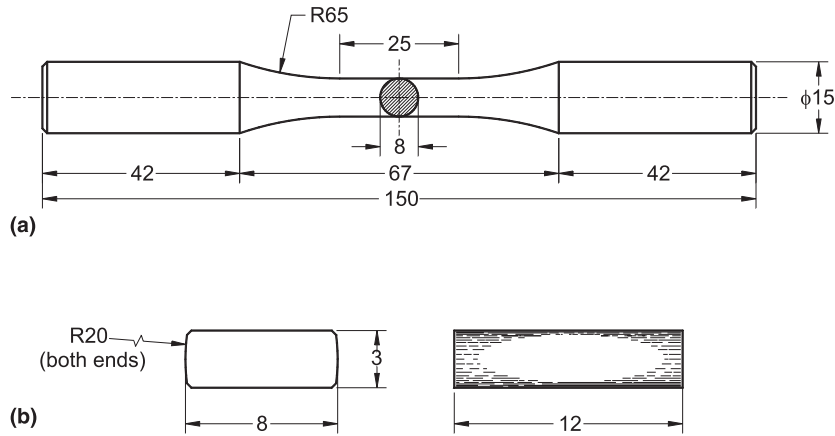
(a) Fatigue and fretting fatigue specimens; (b) fretting pad. Dimensions in mm.
